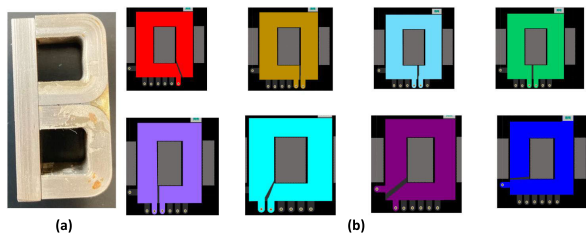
(a) Manufactured inductor (b) Designed PCB windings.
